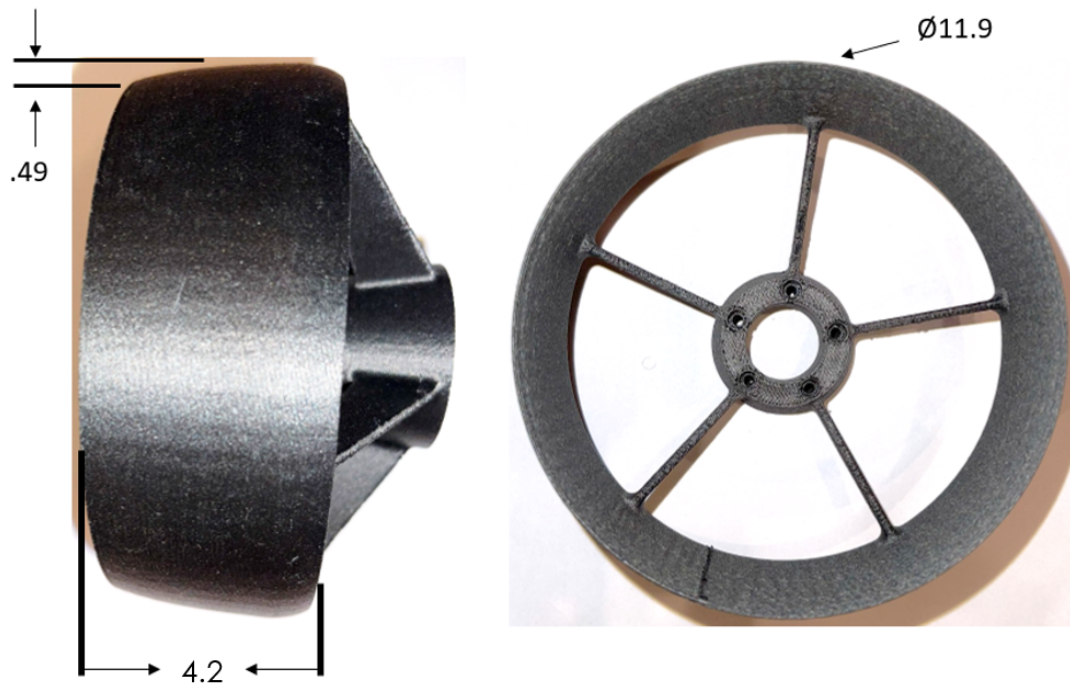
Back view(left) and side view(right) of shroud provided by ARMADA Marine Robotics, dimensions in cm
